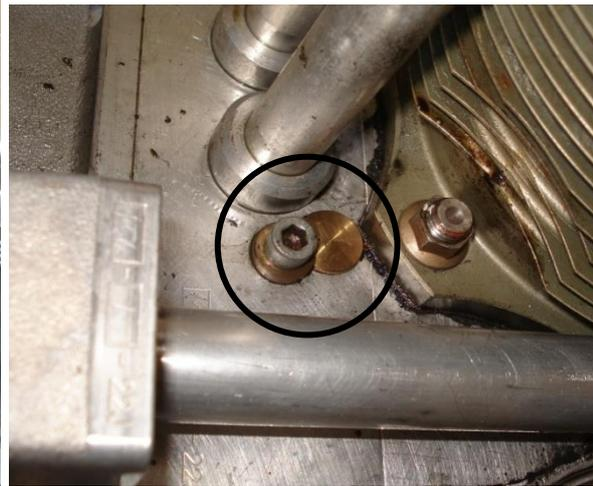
Rocker Lube (Left) & Crankcase Oil Port Blanking Plug
